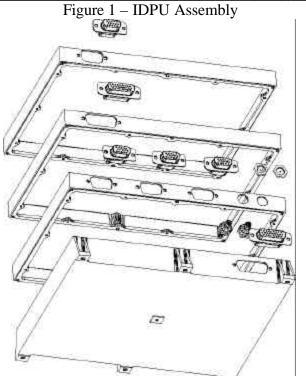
IDPU Exploded View (Note incorrect location of J7)
